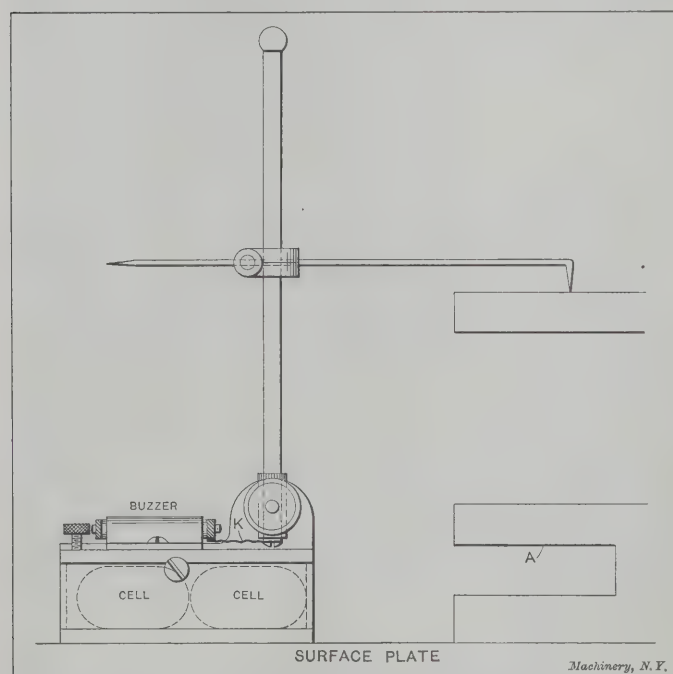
Surface Gage equipped with Electrical Apparatus for Producing Sound when the Pointer is in Contact
